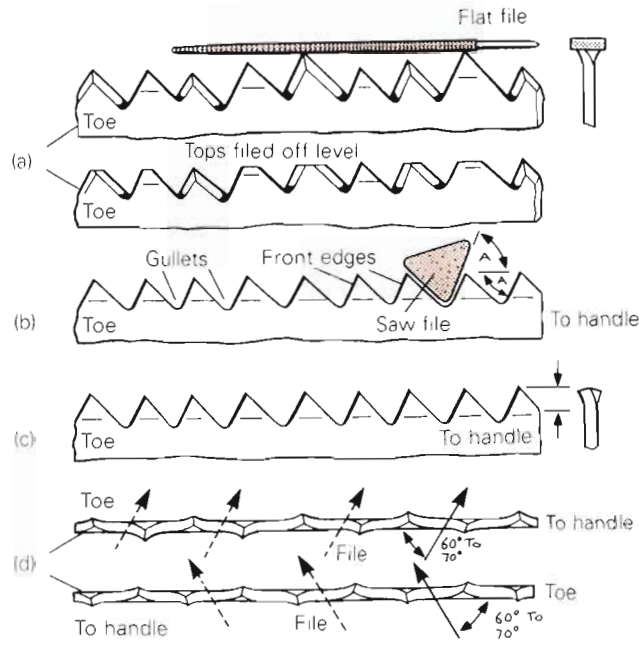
Sharpening hand saws: (a) topping, (b) reshaping, (c) setting, (d) sharpening or filing.
